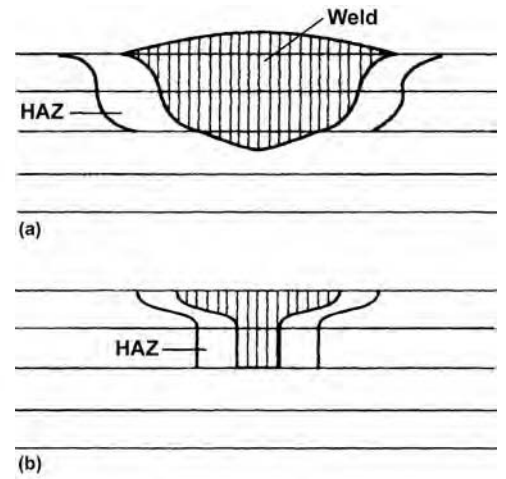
Typical shapes of (a) conduction-limited and (b) penetration (keyhole) laser weld beads. HAZ, heat-affected zone. Source: Ref 43
